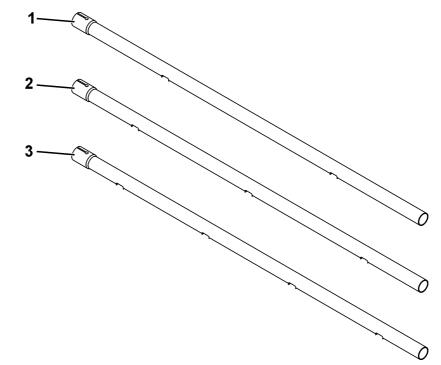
Tube 45x1,25-3050 for Fluxx 330-5/330-14
